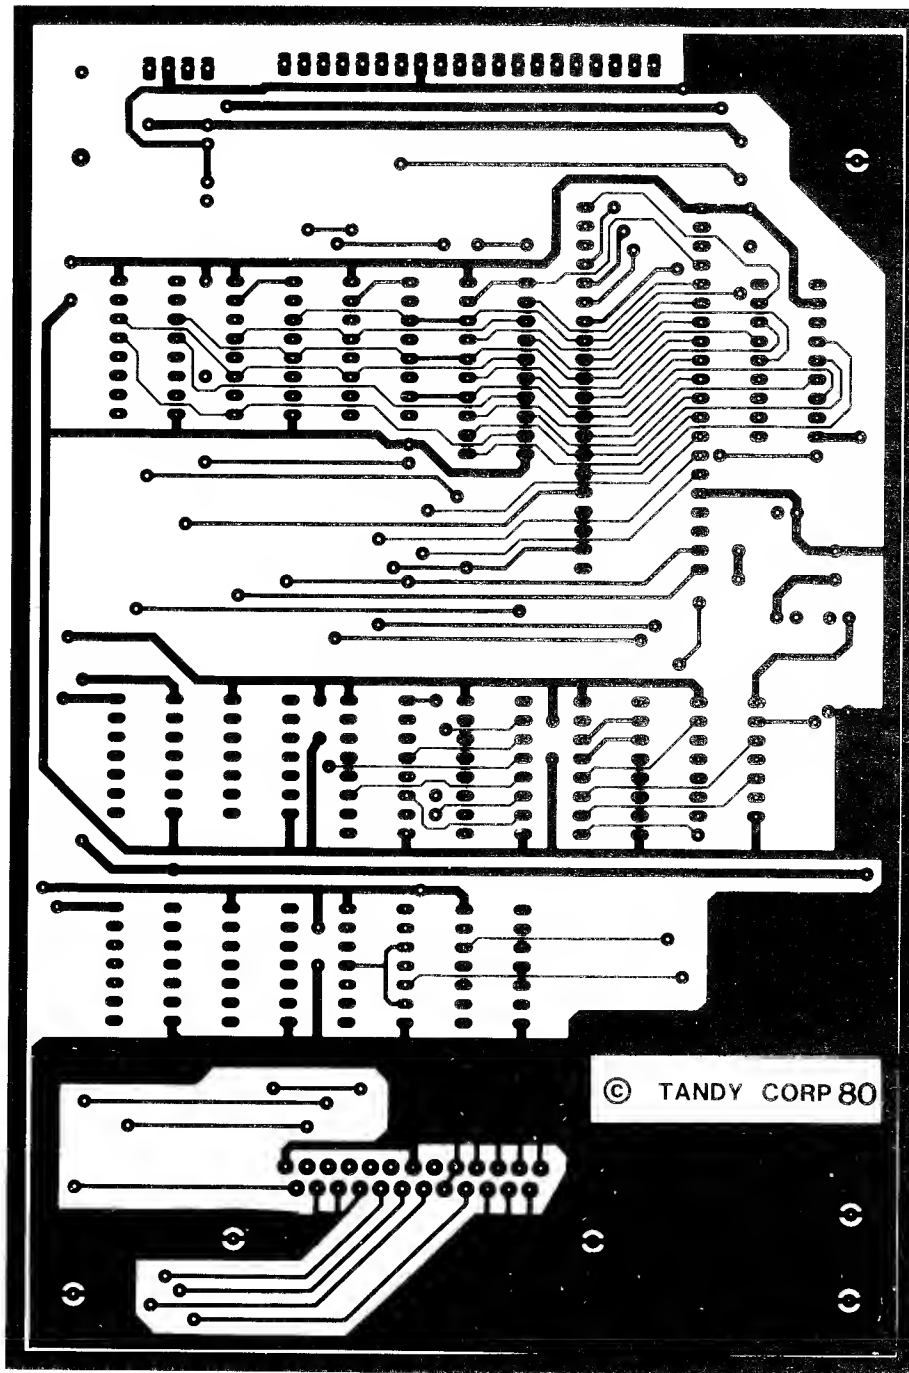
RS-232C PC BOARD — CIRCUIT SIDE
